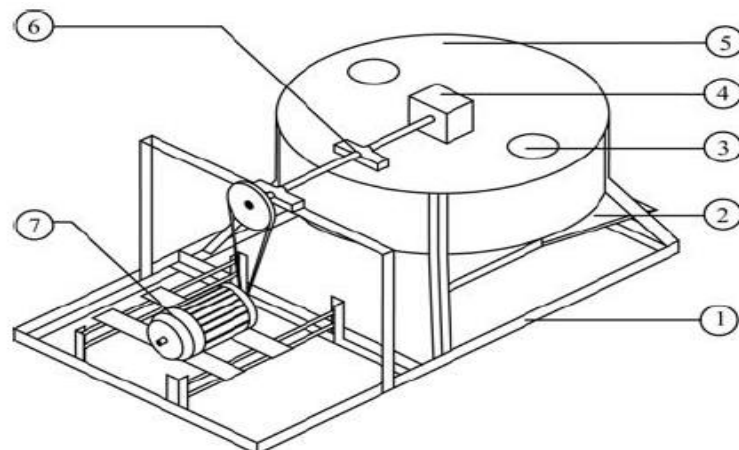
A perspective view of the Universal Tuber Chipping Machine
